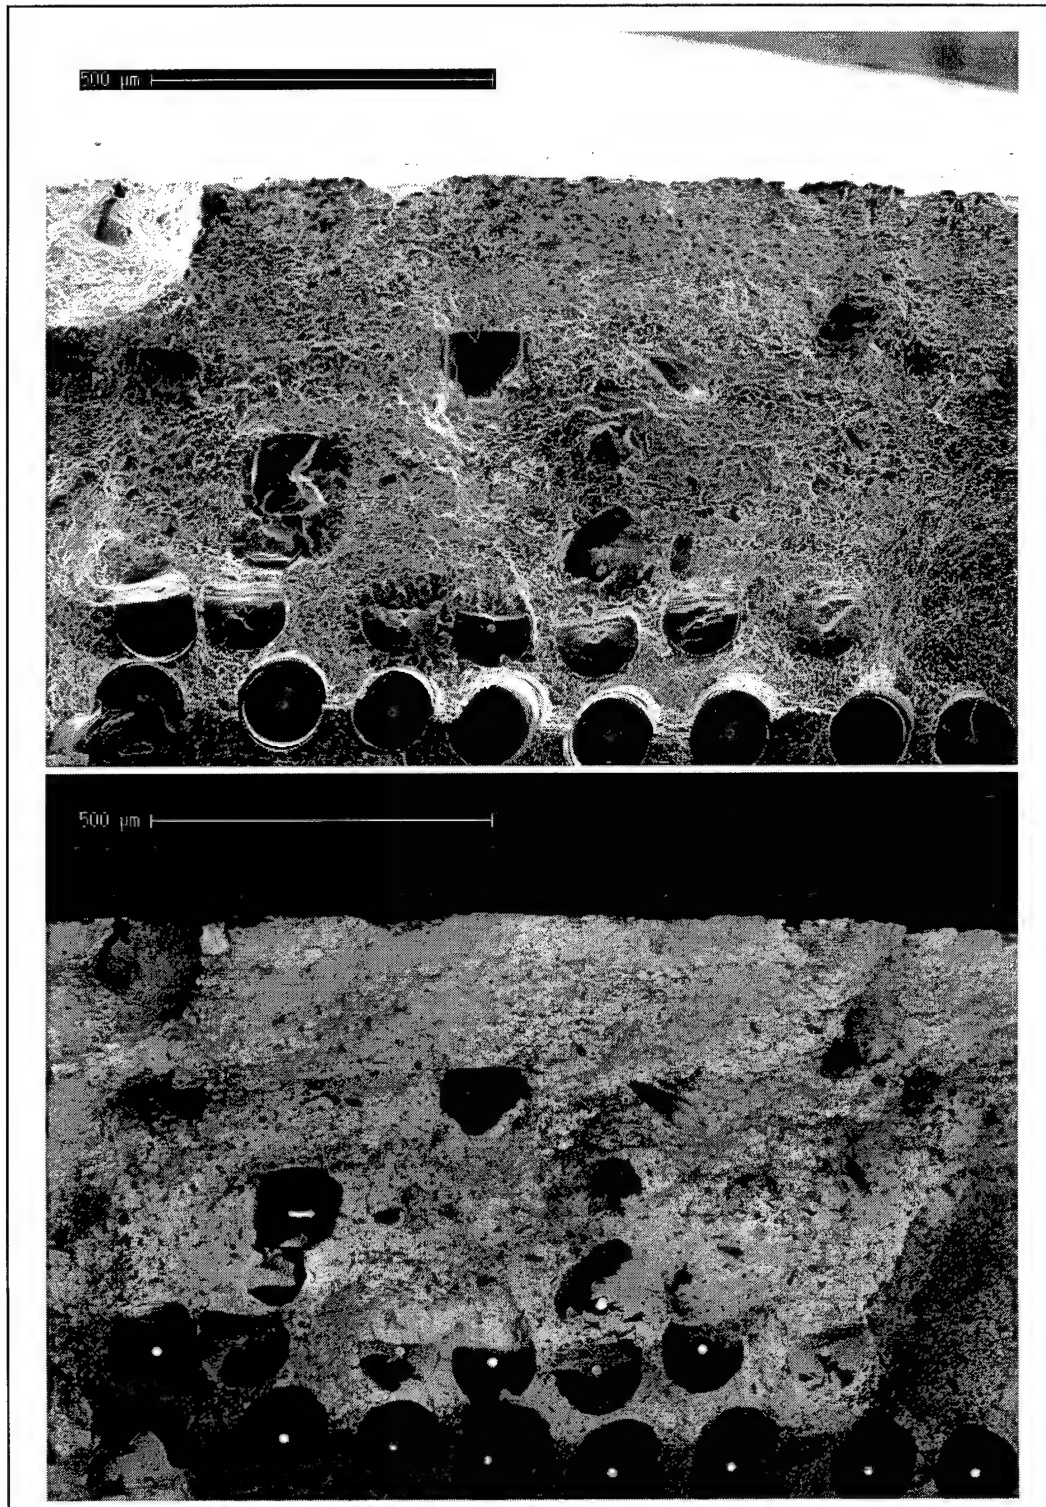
Detail view of upper right corner of Specimen 200 fracture surface. Note that these fiber shards in the monolithic section did not initiate cracks, as did the other shard, since they were aligned with the loading direction.
